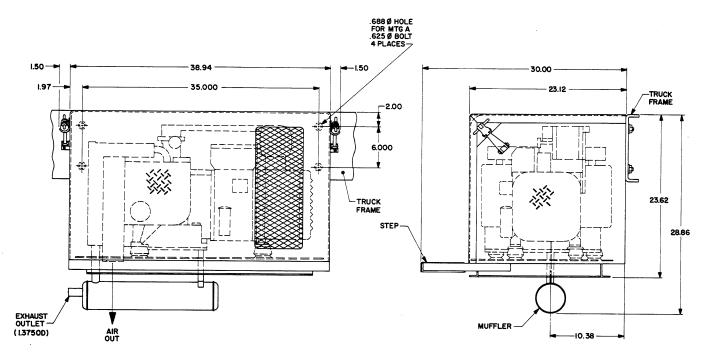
SIDE-MOUNTED COMPARTMENT INSTALLATION DIMENSIONS
